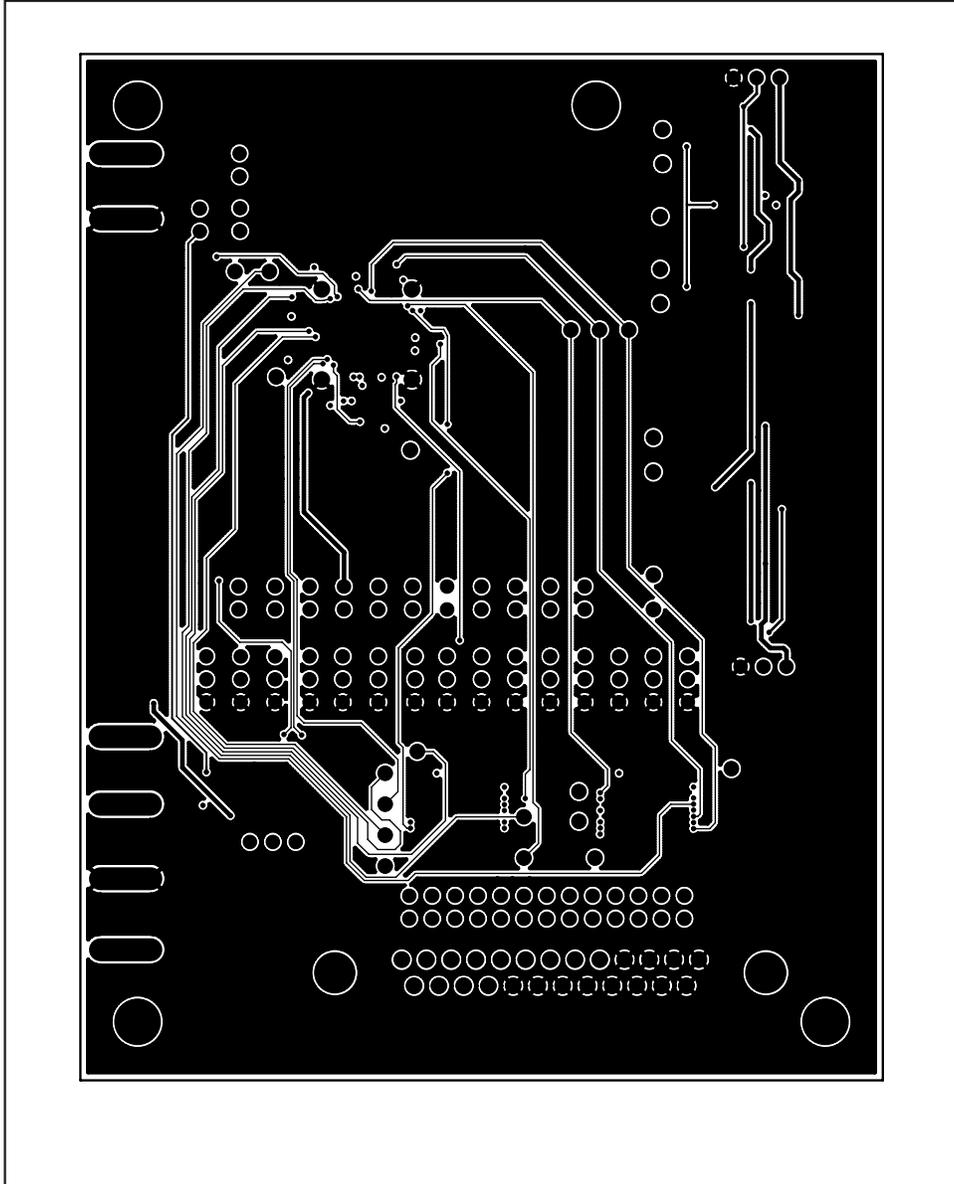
MAX2830 EV Kit PCB Layout—Inner Layer 3 (Routes)
